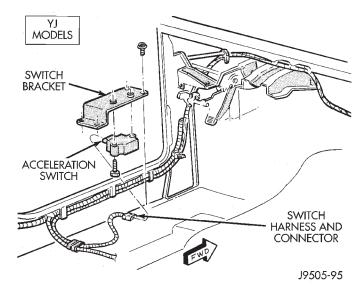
Acceleration Switch Mounting (XJ/YJ)
